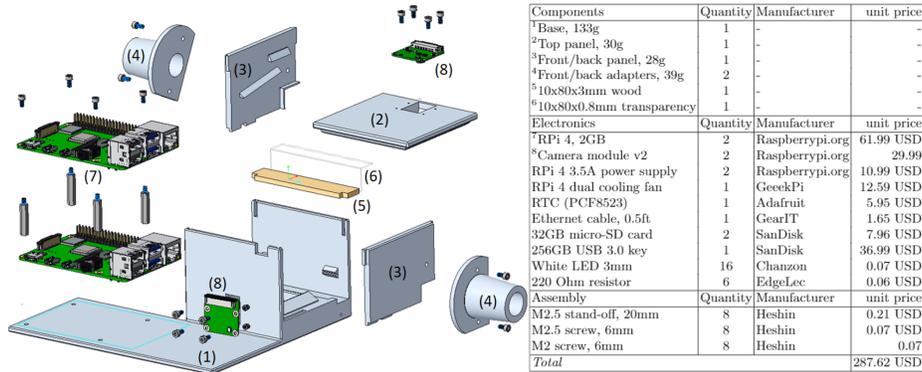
Left: Exploded view of the entrance; numbers relate to superscripts in the table on the right. The cameras are mounted ~ 55 mm from the tunnel surface. Note that all components are also available on Amazon, except for the 3D printed pieces produced with PLA at 21.99 USD/kg. For assembly, users need a screwdriver, a box cutter, a needle nose plier, a soldering iron, a screen, and the ability to program the micro-SD cards.
